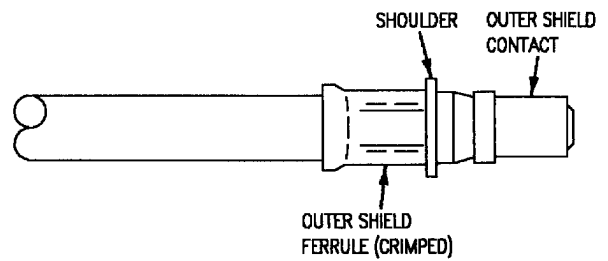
902-5020-2 Triaxial Assembly Procedure (Sheet 2)
